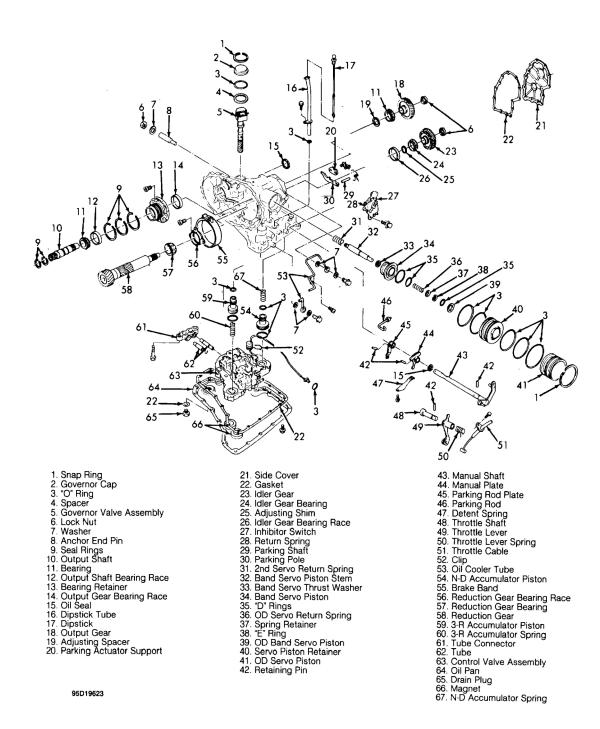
Exploded View Of Transaxle Case Components Courtesy of NISSAN MOTOR CO., U.S.A.
